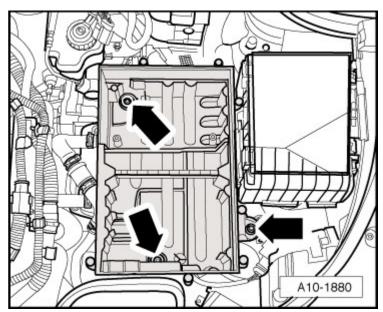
Identifying Screws For Lower Portion Of Air Cleaner Housing
